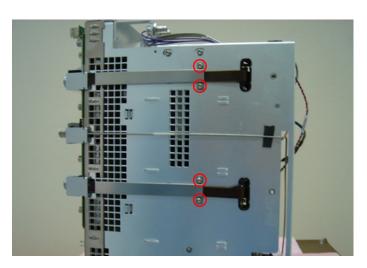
Remove the 4 units of screws on both of the cable shields
